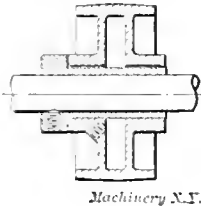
Loose Pulley used on Main Countershaft; the Core is filled with Wicking.
